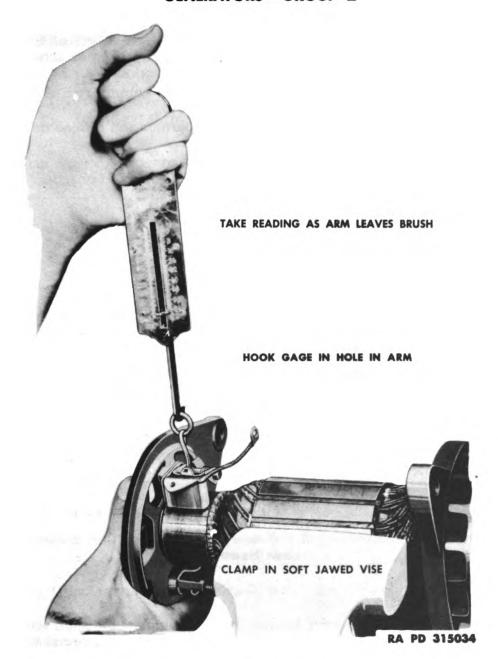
Measuring Brush Spring Tension on Group 2 Generators with Tension Gage (41-G-105)
